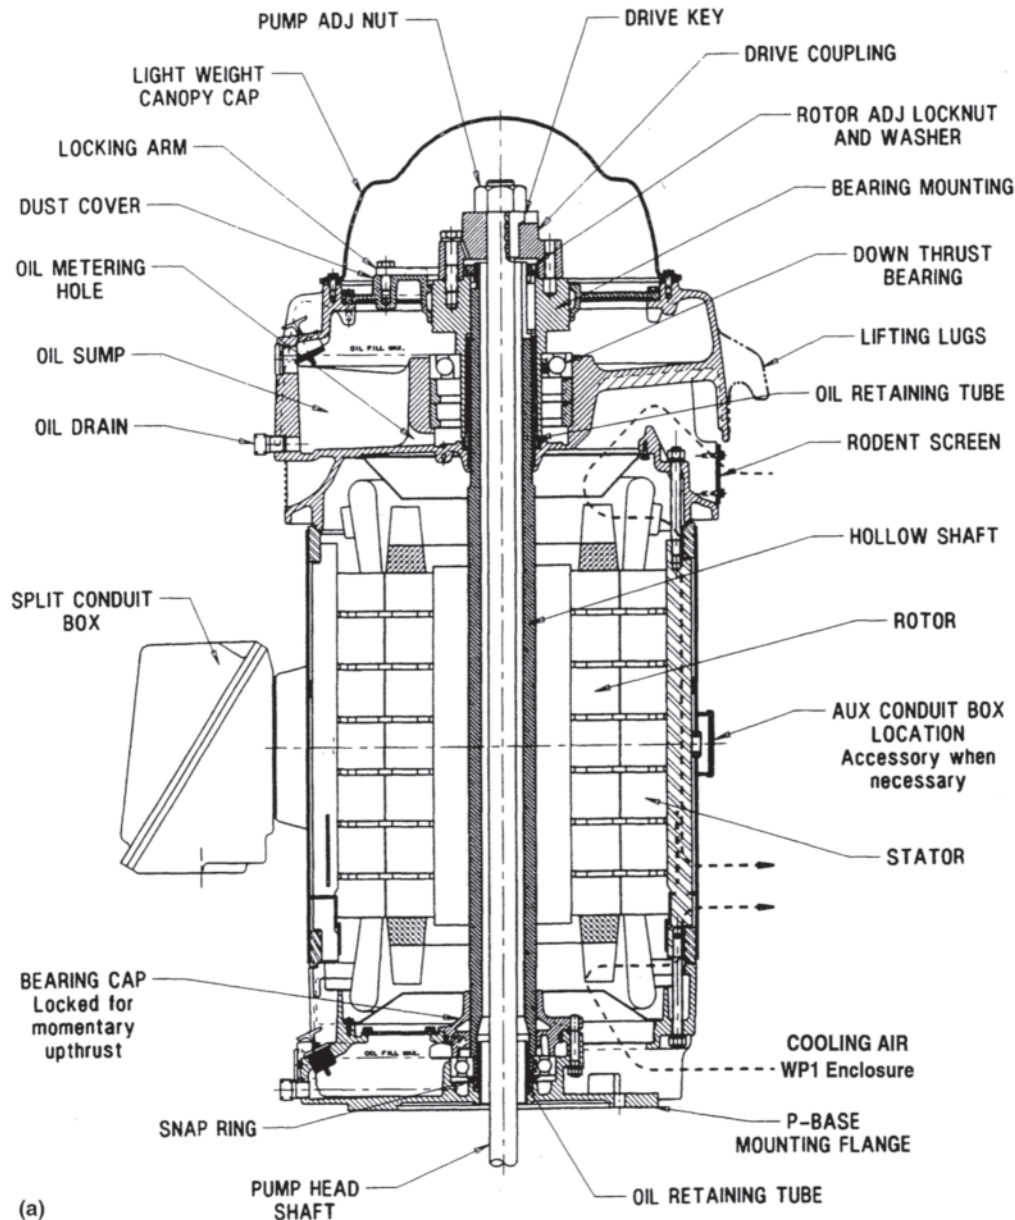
(a) Nomenclature for deep well turbine pump motors.
